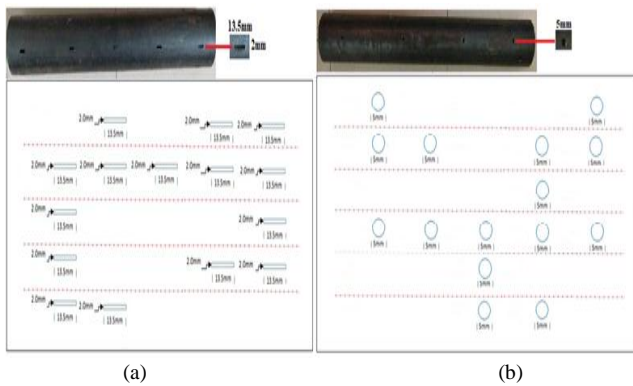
Geometry dimension on carbon steel pipe (a) axial defect (b) hole defect
